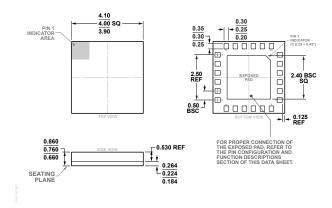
24-Terminal Land Grid Array [LGA] (CC-24-17) Dimensions shown in millimeters
